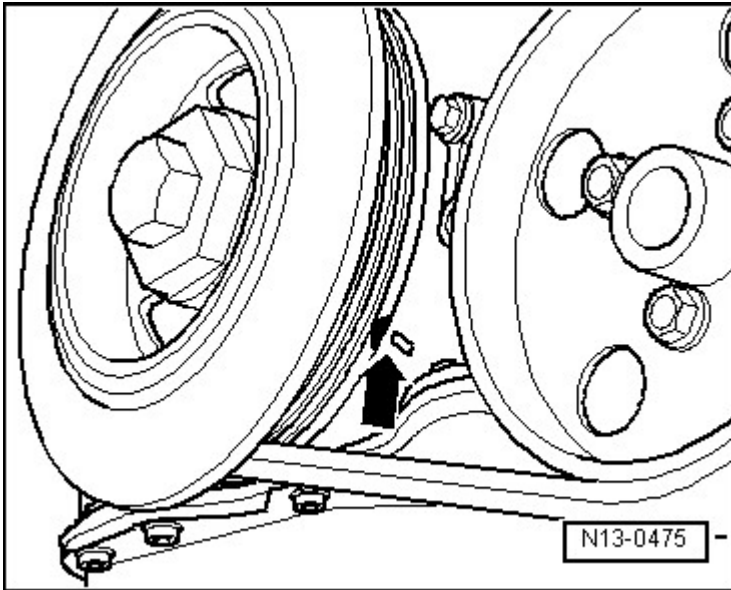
Identifying Crankshaft At Vibration Damper Securing Bolt In Engine At TDC Cyl. 1
